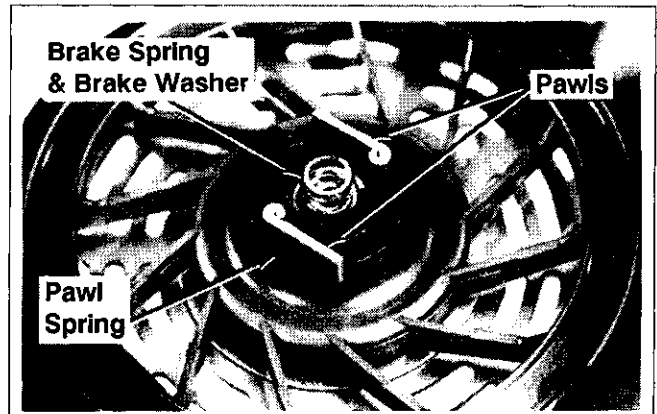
Brake Spring and Washer, Pawls, and Pawl Springs.
